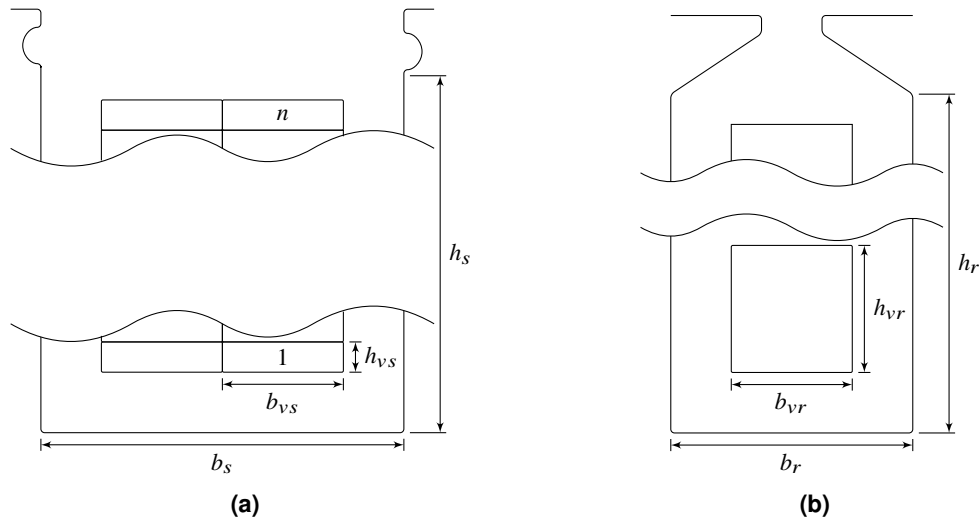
6 MW mill motor coil location and slot variable of (a) stator and (b) rotor.
